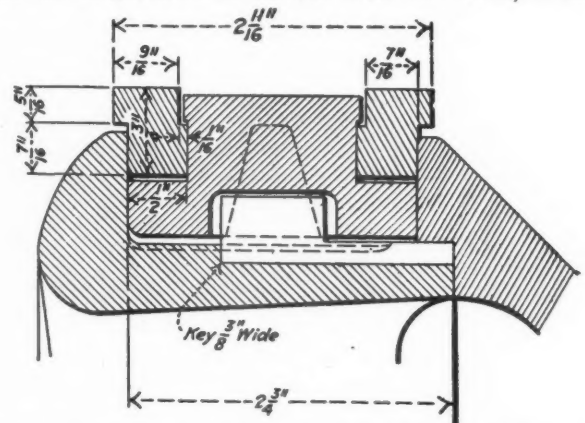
Cross section of piston valve bull ring and Z-type packing rings
